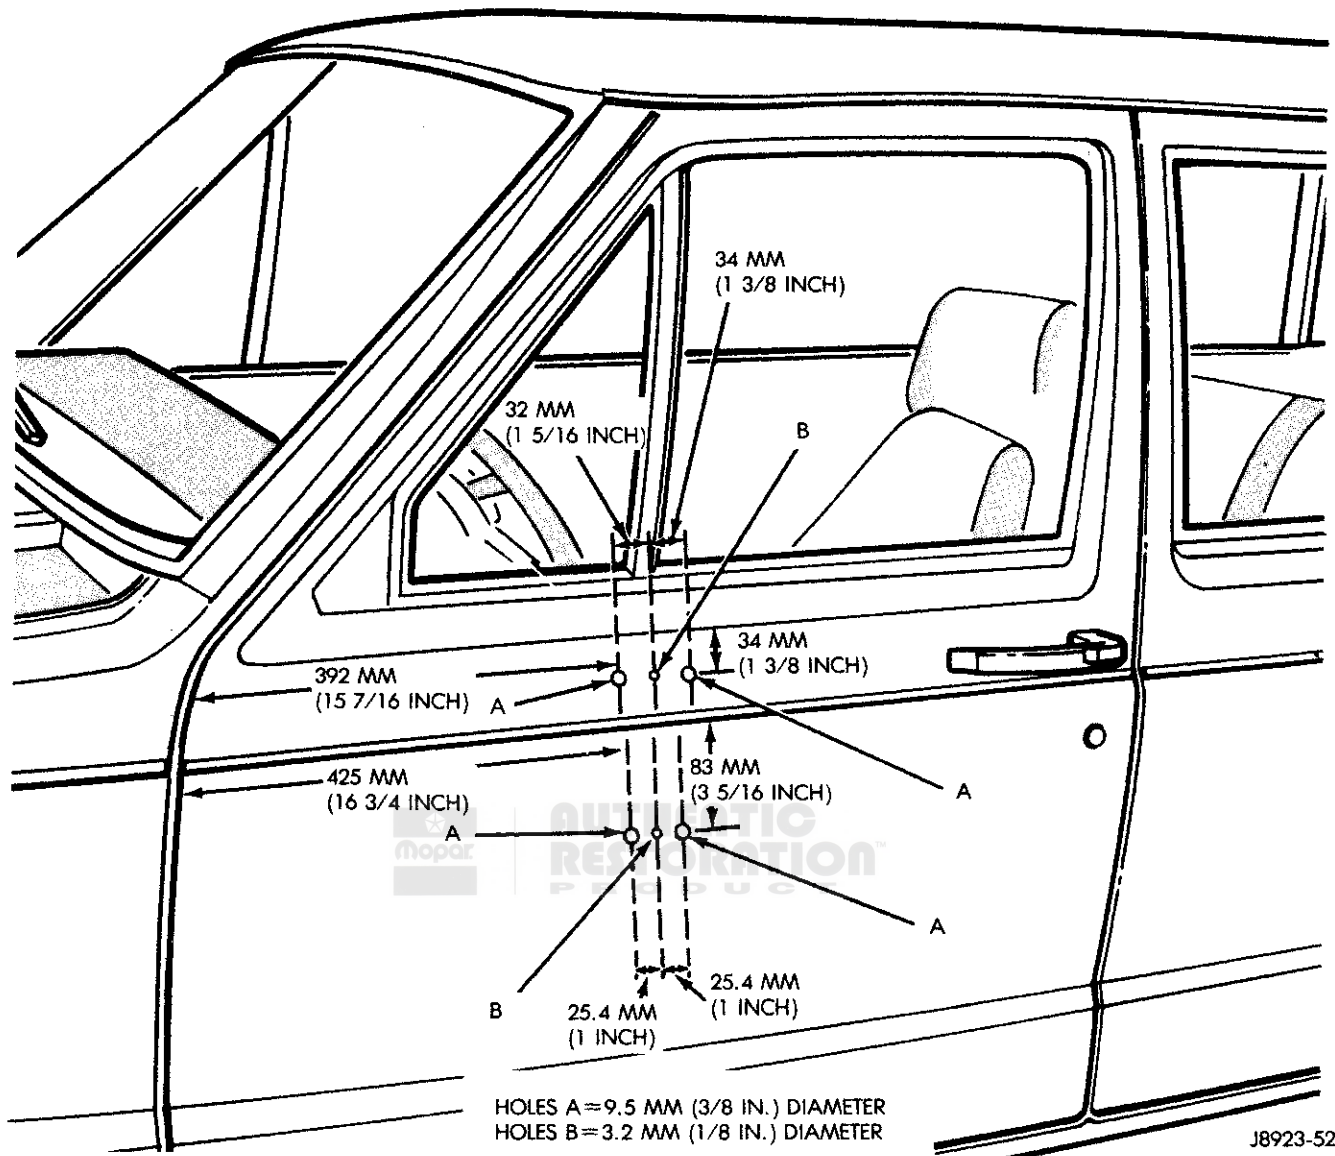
Mirror Mounting Bolt And Rivet Hole Locations
